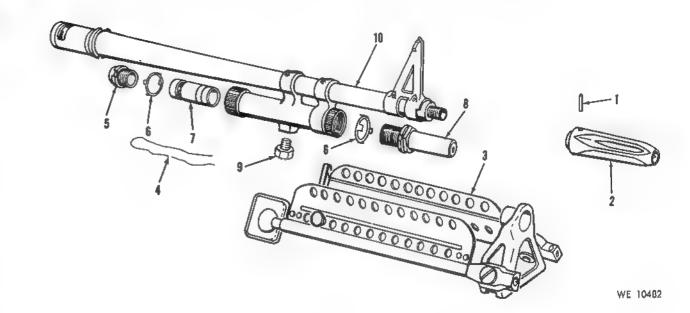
Barrel Assembly with Bipod Assembly—Partially Exploded View.
